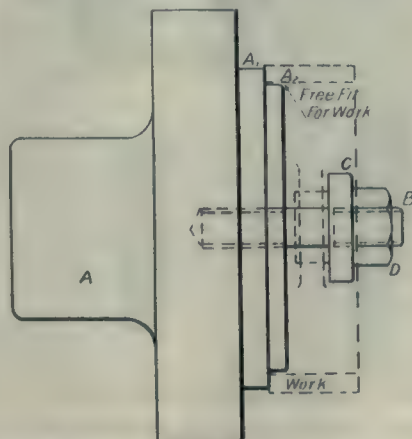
FRONT AND SIDE VIEW OF TURNING FIXTURE FOR FIRST OPERATION
